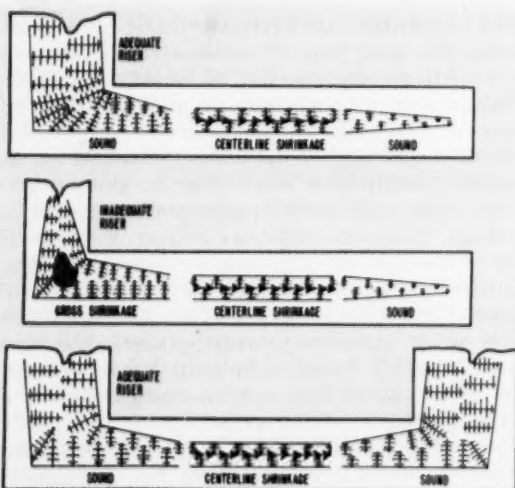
Feed metal channels in plate and bar castings of uniform thickness.
